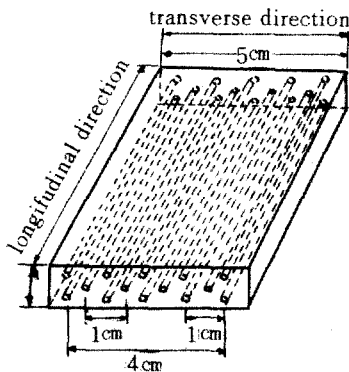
The wire placement of specimens of wood particle-wire three layers composition board.
